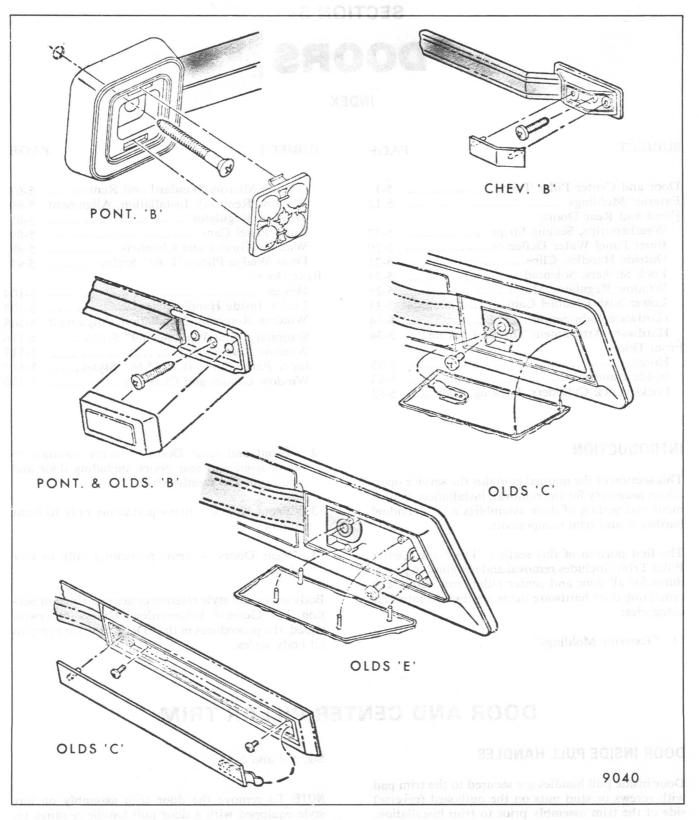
Typical Door Pull Handle Attachment - "B, C and E" Styles
